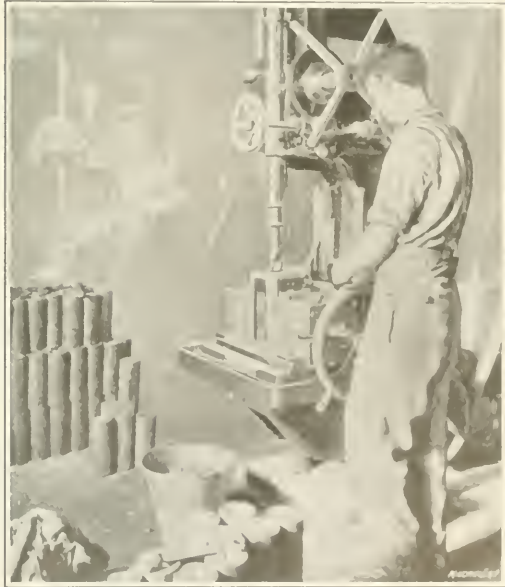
Baker High-power Drilling Machine at Work on British 18-pound High-explosive Shells
